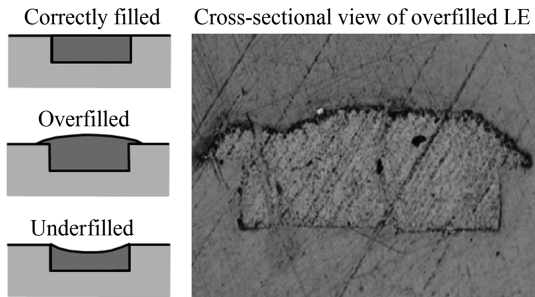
Typical defects occur when either the mold is under- or overfilled. Microscope still shows a leading edge that was sectioned.
